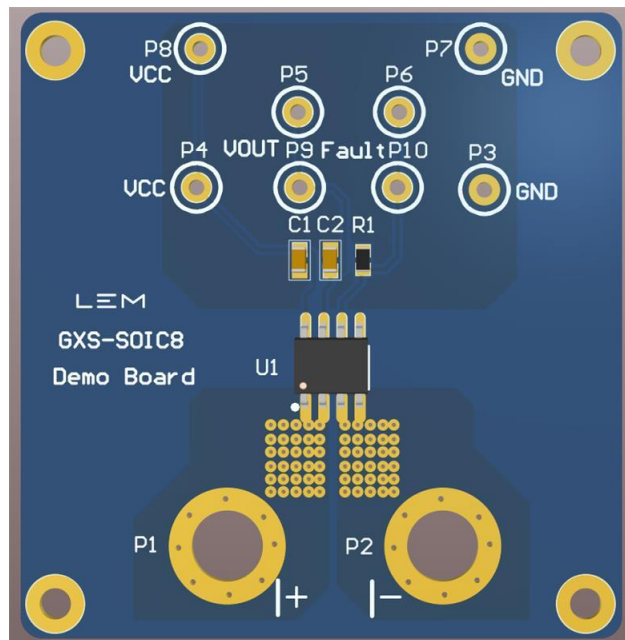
GXS ANF\_SOIC8 Package PCB Layout
